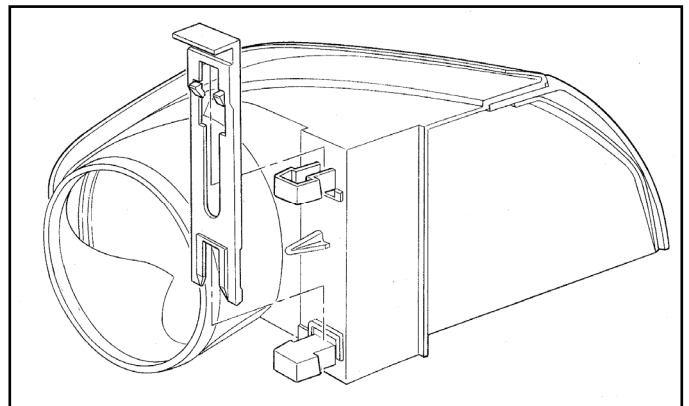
New Intrigue Headlamp Mounting Design – Clip Installed
